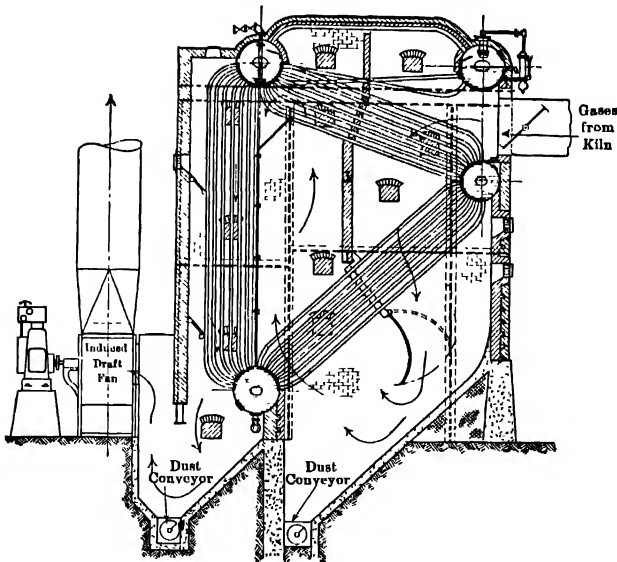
Induced Draft for Waste-heat Boiler Equipment.
